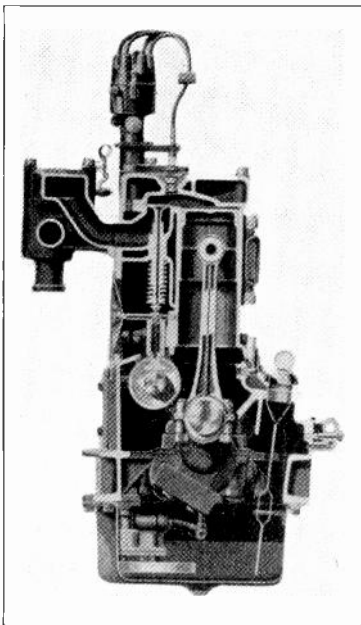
This sectional end-view of a modern automobile engine clearly shows the arrangement and location of important parts such as piston, connecting rod, crank shaft, cam shaft, valves, etc. Courtesy Oldsmobile Mfg. Co.
